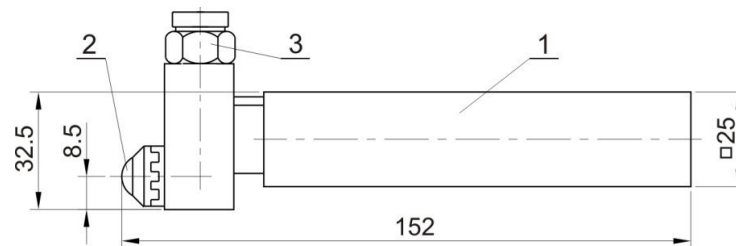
The Nklh2525 ball burnisher with hydraulic presser: 1 – shank, 2 – ceramic ball, 3 – oil supply (Przybylski, 2004).
